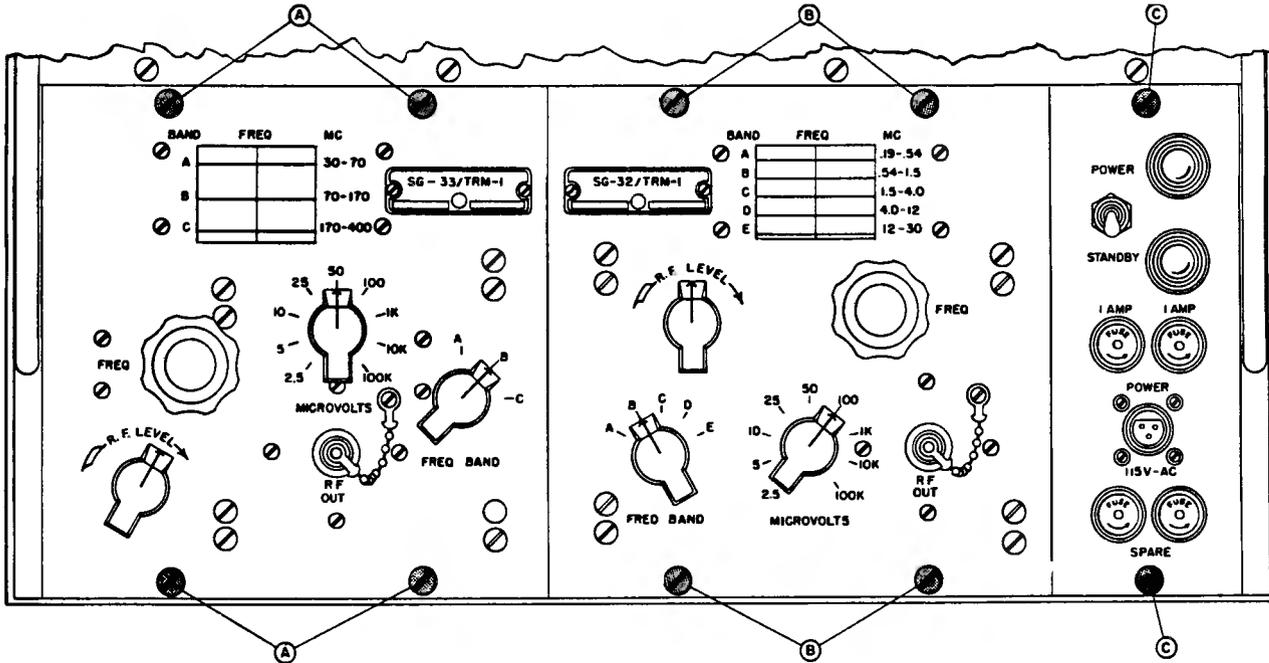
Front View for Removal of Signal Generators from the Equipment Case
